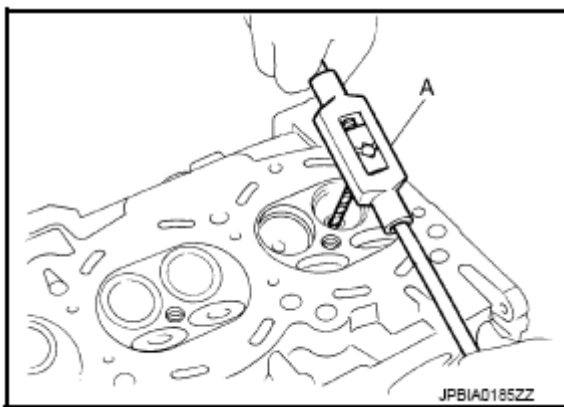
Reaming Cylinder Head Valve Guide Hole Using Valve Guide Reamer
